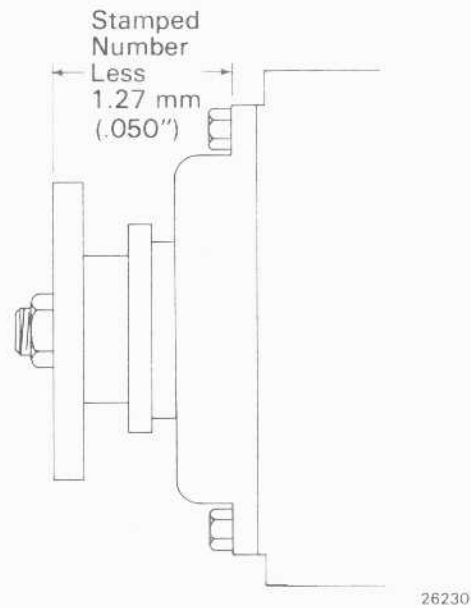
Auxiliary Generator Drive Thrust Measurement (Single Stamped)
